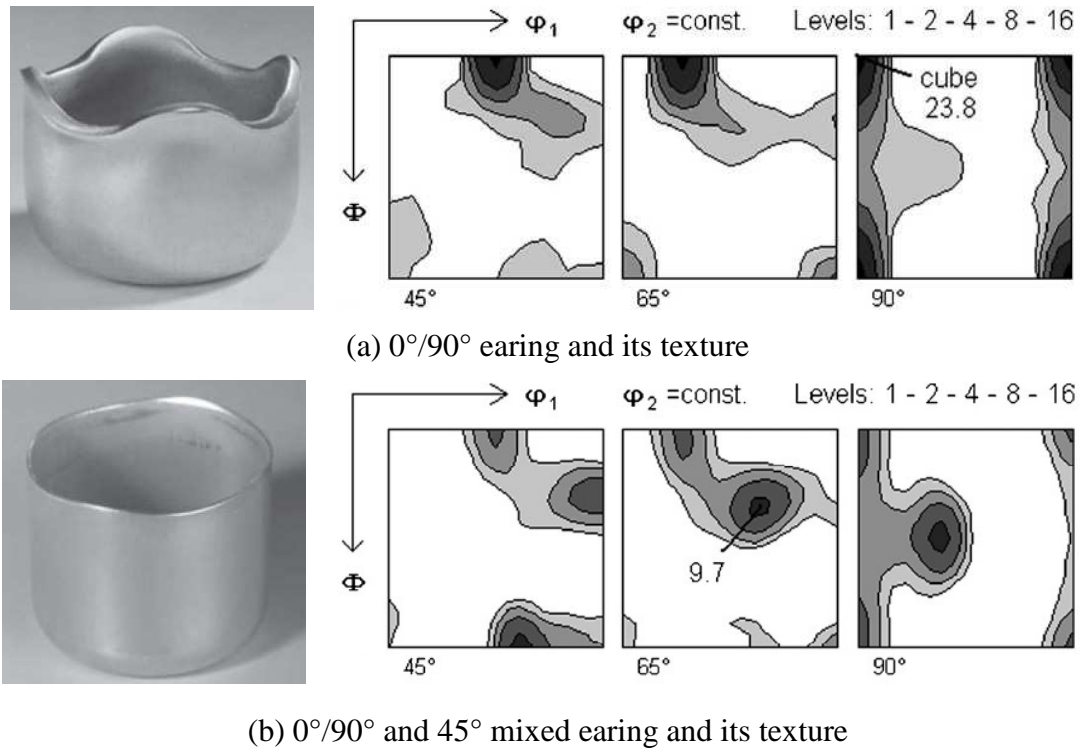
Earing in deep drawing textured sheet [5-6].
